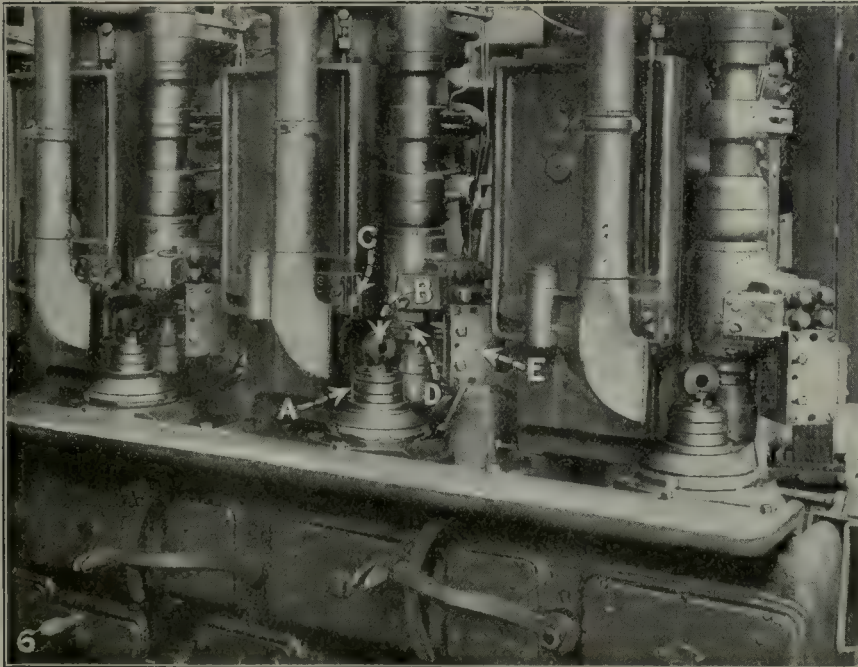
MACHINE USED IN TURNING, FACING AND GROOVING
